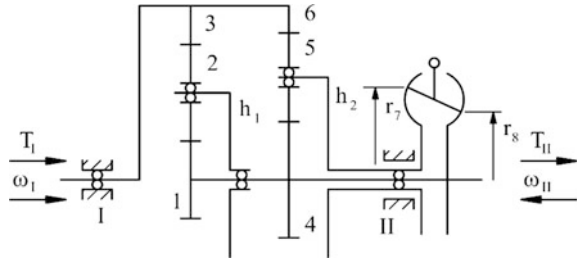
Second variant of wind turbine planetary gear-friction gear set with free ring gear
